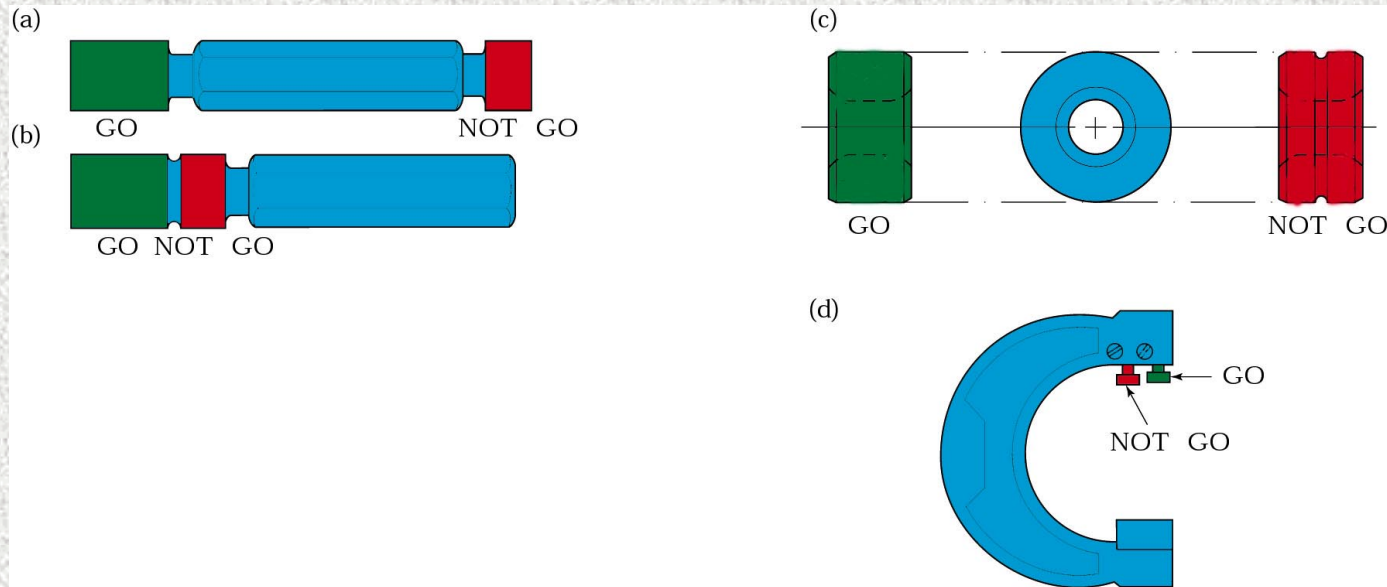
(a) Plug gage for holes, with GO-NOT GO on opposite ends. (b) Plug gage with GO-NOT GO on one end. (c) Plain ring gages for gaging round rods. Note the difference in knurled surfaces to identify the two gages. (d) Snap gage with adjustable anvils.
